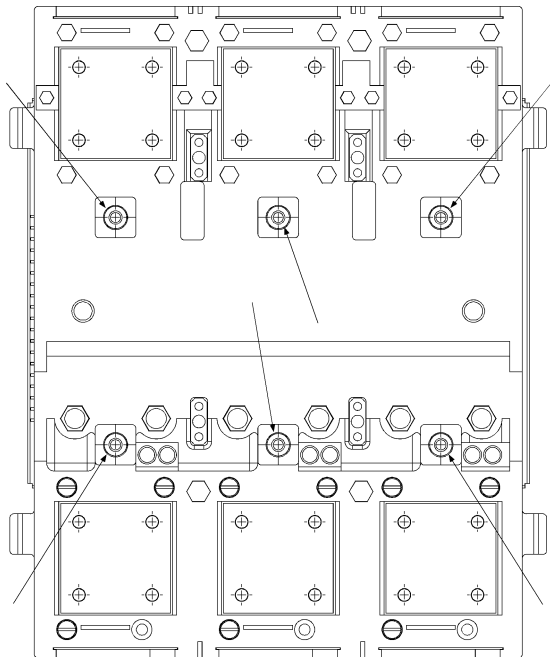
Locations of the 3/8-16 x 7/16-inch deep screw inserts for mounting the breaker in equipment, 2500-3000 A back-connected frames.
